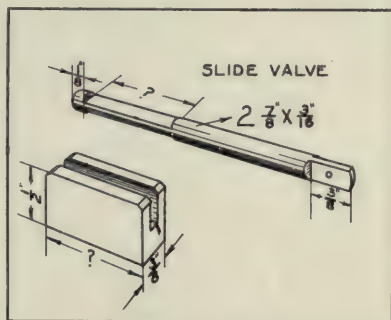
SLIDE VALVE AND SIDE VIEW OF VALVE ROD.
